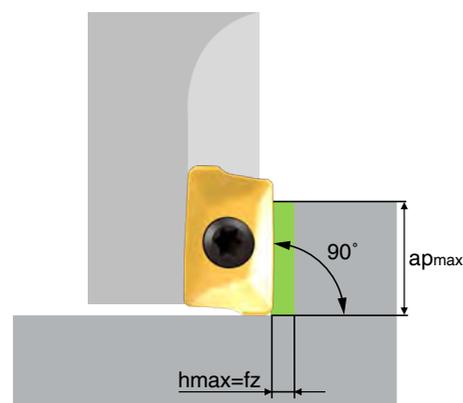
Geometrical relations between feed per tooth, cutting edge angle, and chip thickness.
